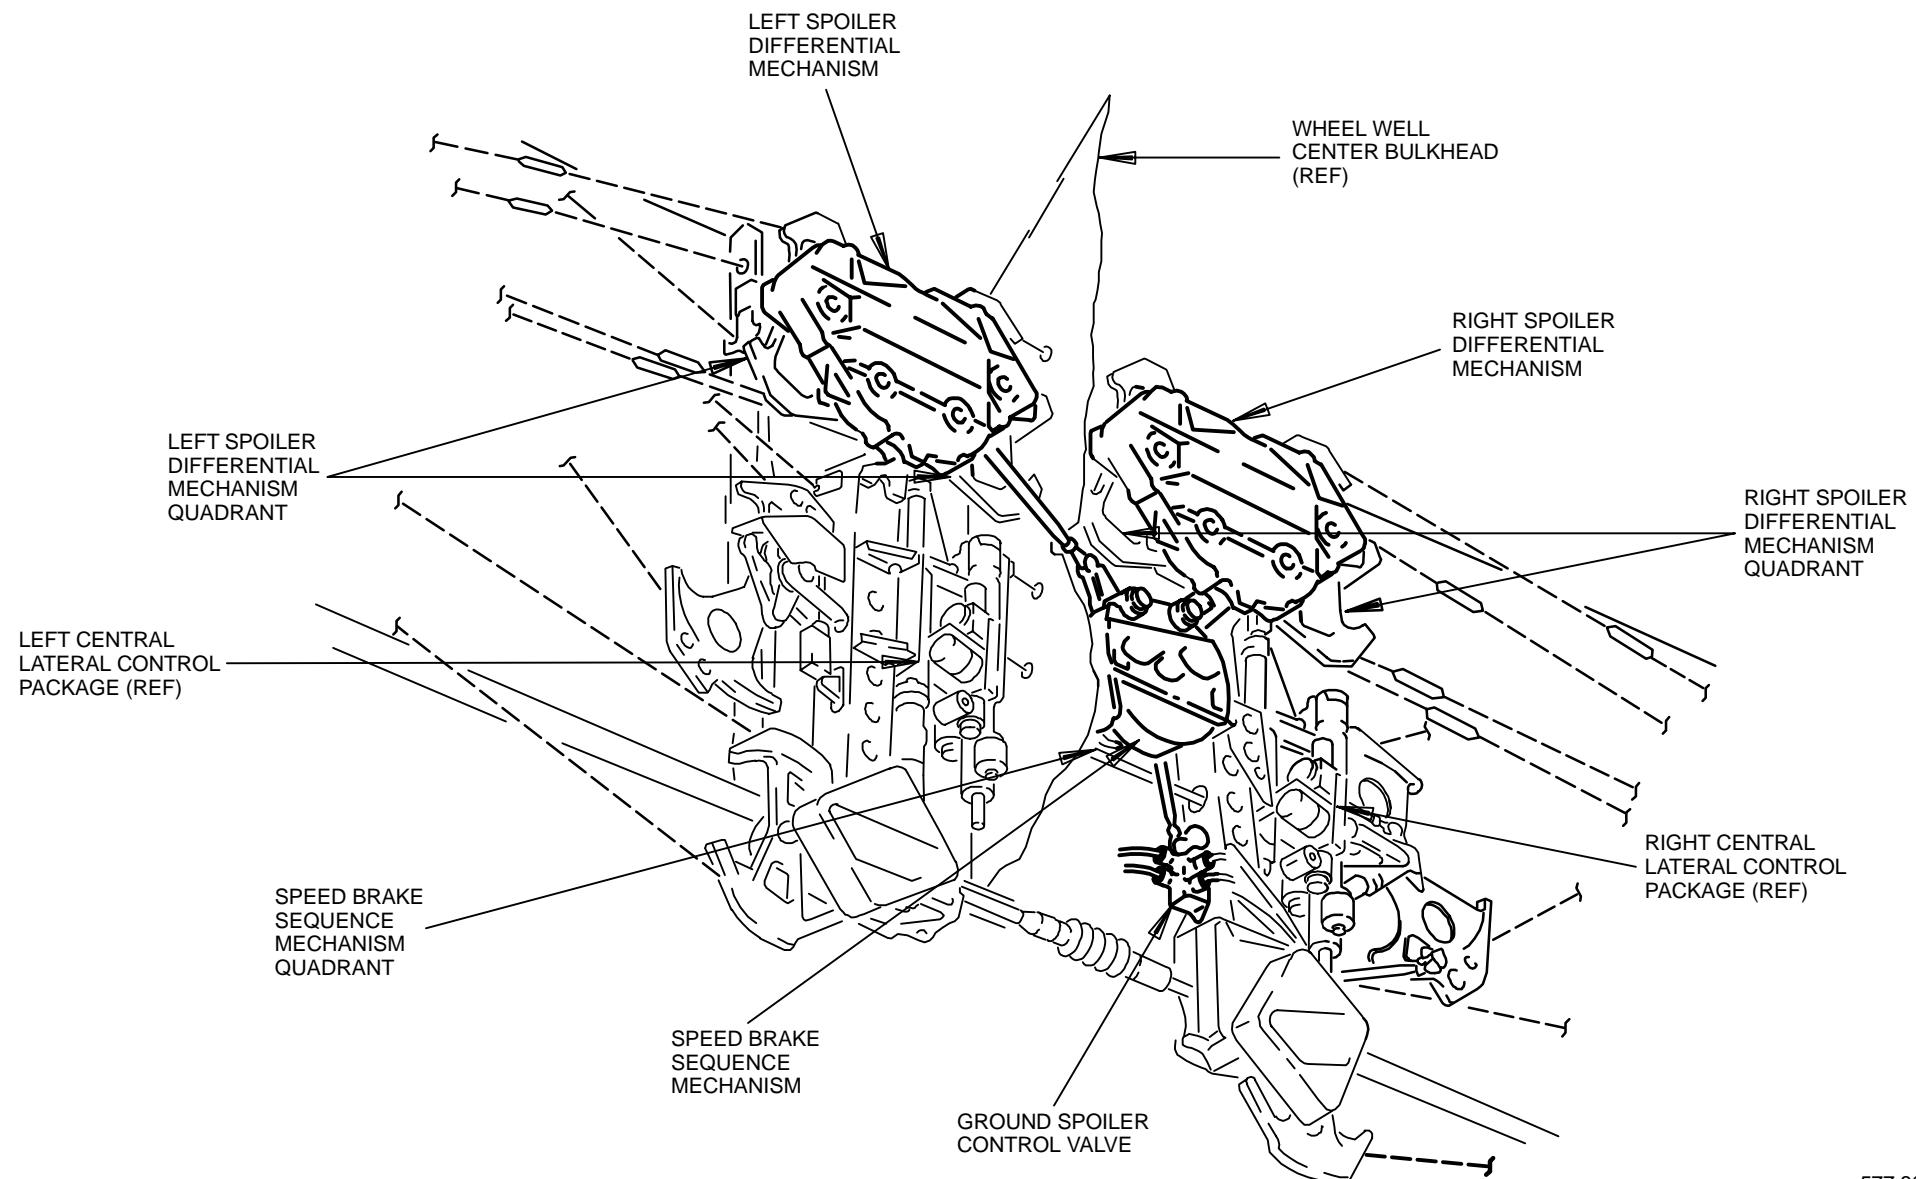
WING GEAR WHEEL WELL COMPONENTS OVERVIEW
